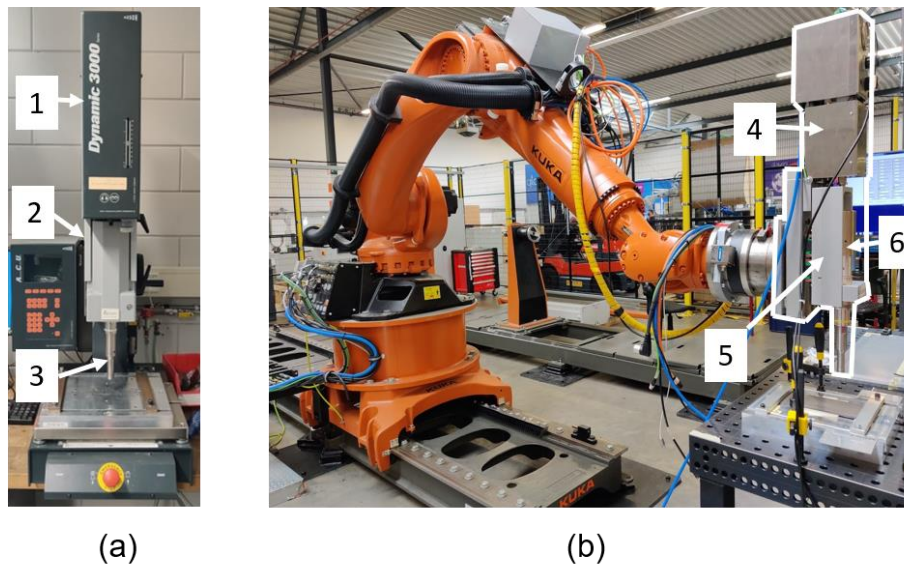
Overview of welding hardware: (a) Static table-top machine (1. pneumatic press, 2. closed box carriage on rails and 3. ultrasonic train with sonotrode visible) and (b) EEF setup outlined in white on the KUKA KR210 R2700 Extra robot (4. pneumatic press, 5. open box carriage on rails and 6. ultrasonic train)
